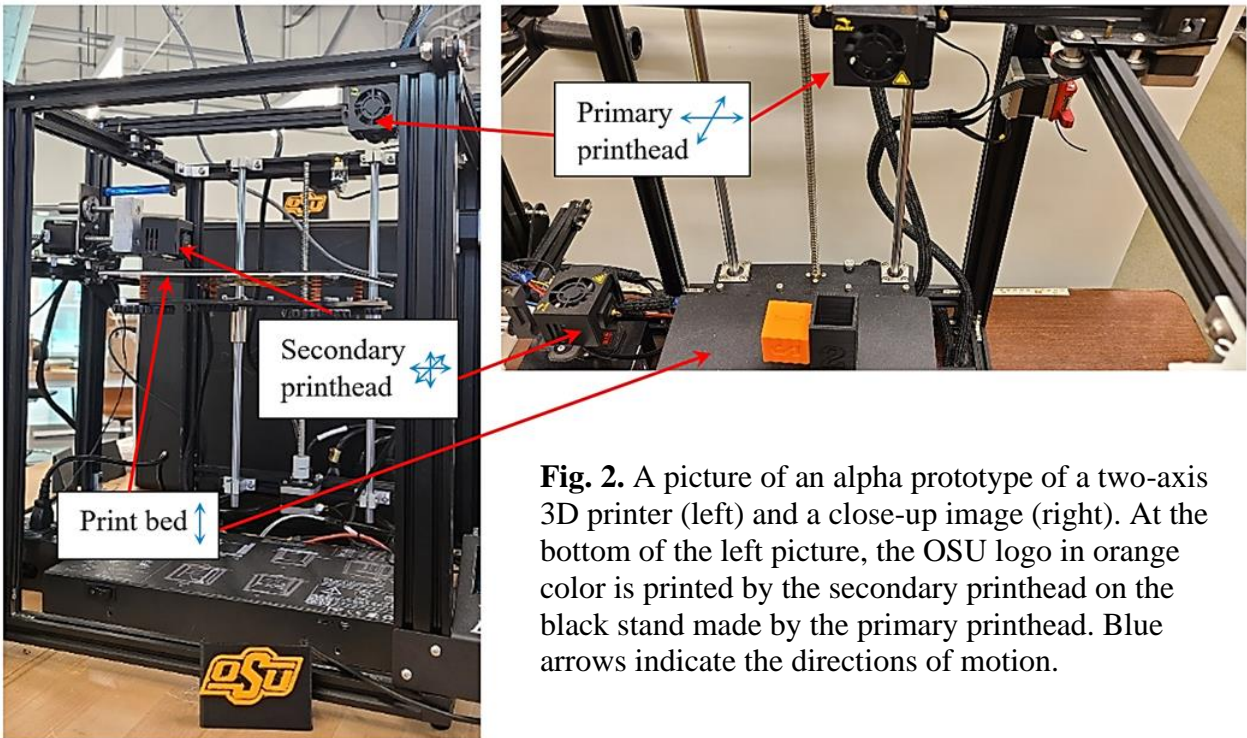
A picture of an alpha prototype of a two-axis 3D printer (left) and a close-up image (right). At the bottom of the left picture, the OSU logo in orange color is printed by the secondary printhead on the black stand made by the primary printhead. Blue arrows indicate the directions of motion.
